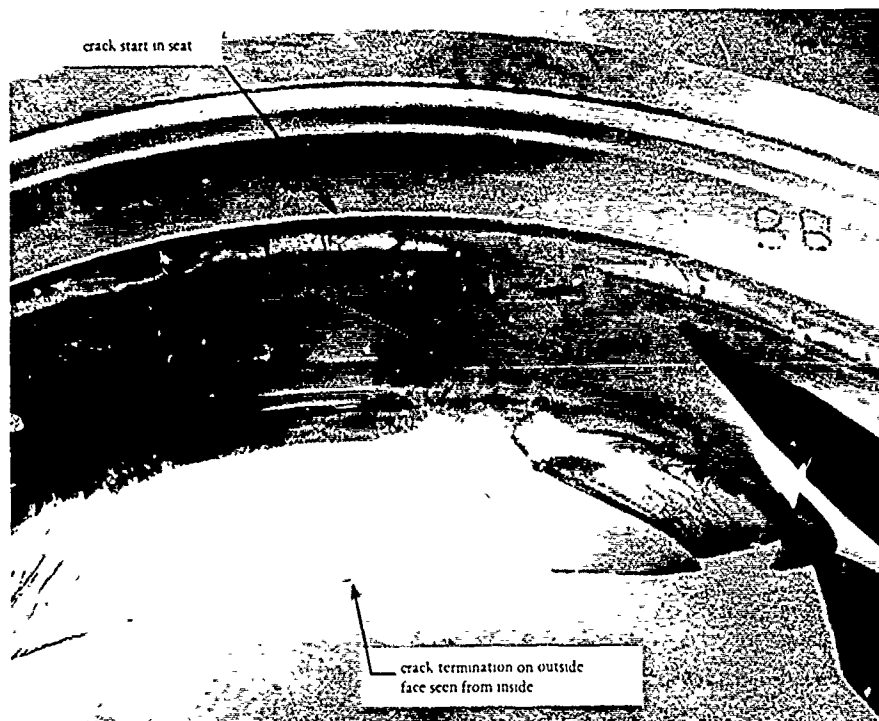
Typical cyclic fatigue circumferential cracks on the bearing surfaces of Type VI flanges that cause the window to leak after a few pressure cycles; window BB, Type VI after two standard pressure cycles to 8,000 psi.
